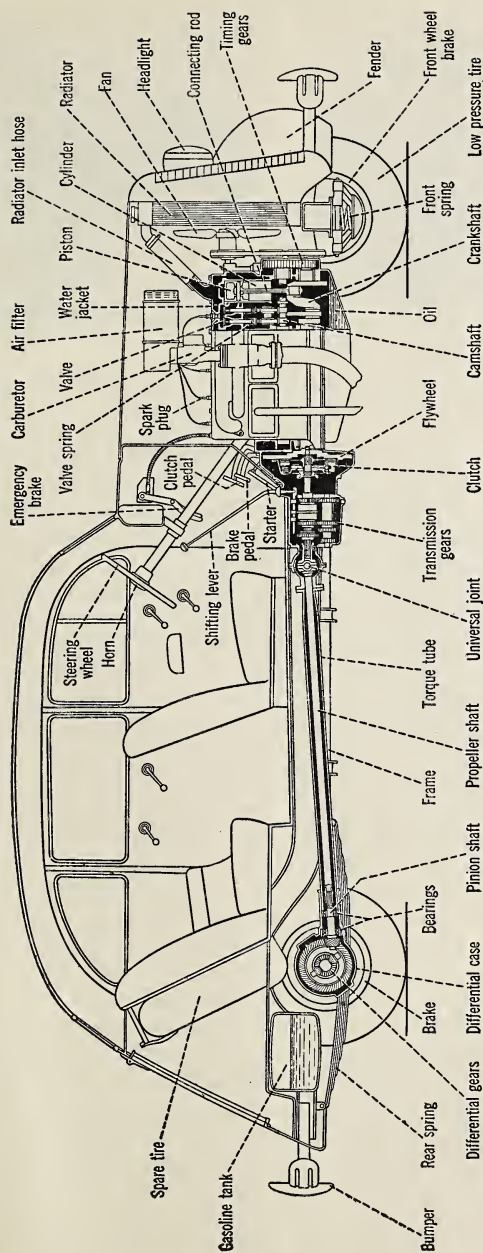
The way an automobile would appear after being sawed lengthwise is seen in profile. It shows the position of the radiator, the fan, the engine, the crankshaft, the camshaft, the propeller shaft, the universal joints, the transmission gears, the differential, and many other parts.
